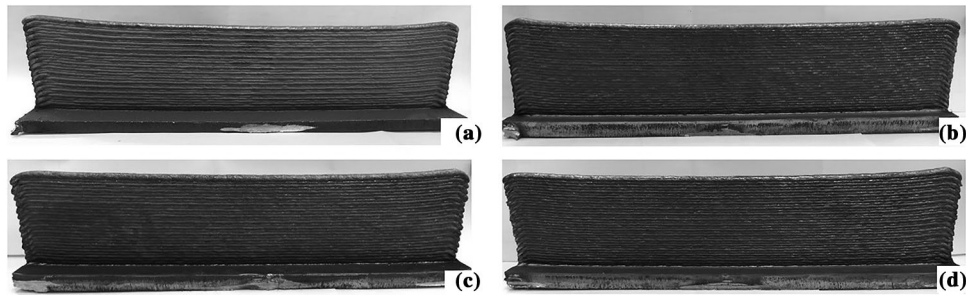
(a) Wall 1, (b) wall 2, (c) wall 3, and (d) wall 4 produced by WAAM.
